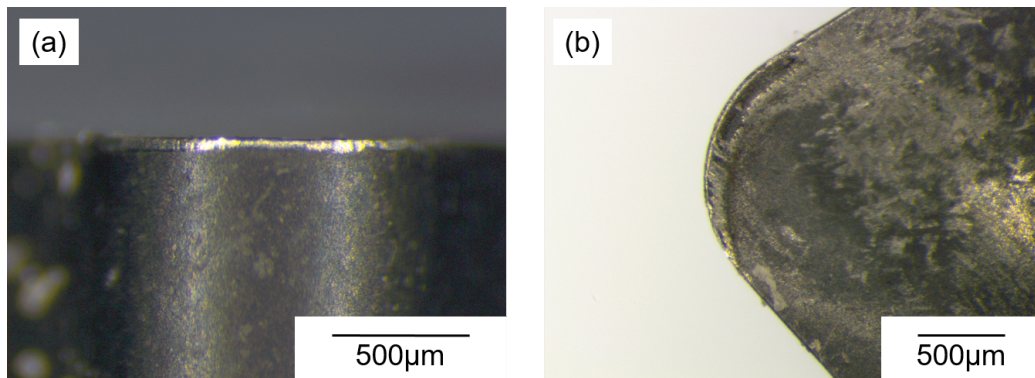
Microscope images showing the degree of tool wear after trial 3.2.5 on billet 4.1. Showing (a) the flank face and (b) the rake face.
